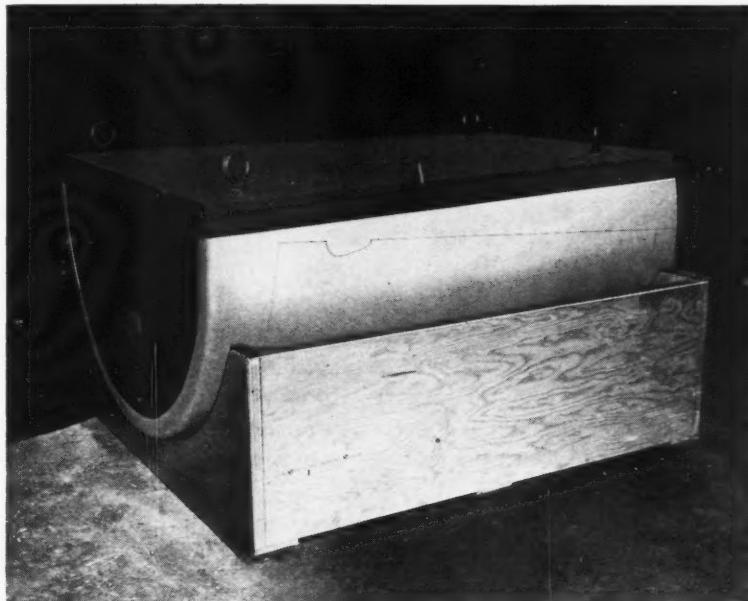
A finished plastic stretch-press die with handling cradle. This tool is used in the stretch-forming of fuselage sections
